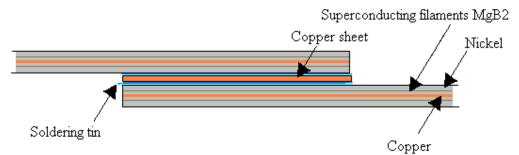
To remove heat from the joint one could put a copper sheet inside the overlap joint.
